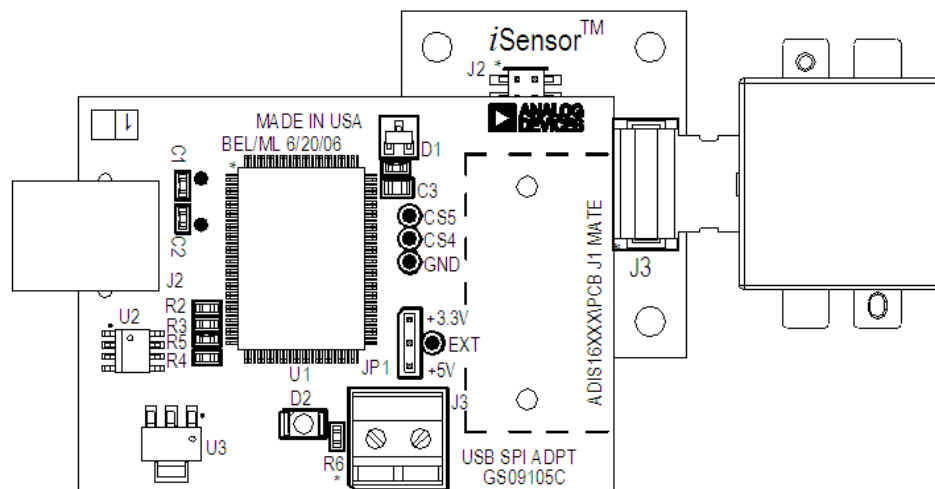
USB Interface PCB connection with ADIS135x/PCBZ, Top View
